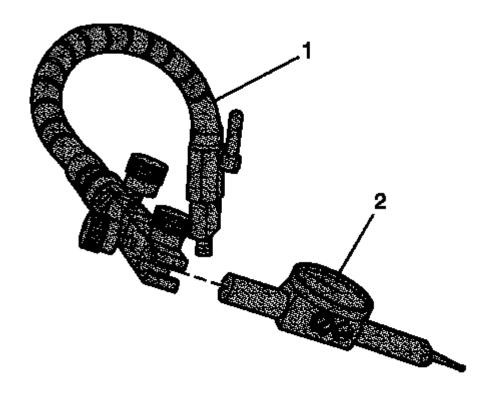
View Of Swivel Base & Dial Indicator Courtesy of GENERAL MOTORS CORP.
